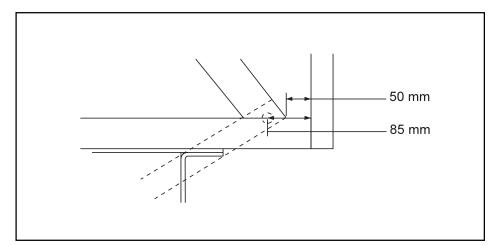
Dimension Viewed from Left Side of Pinsetter.
